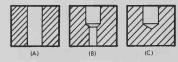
Kinds of holes to be threaded. (A) Open hole; (B) Partly open hole; (C) Closed hole.
